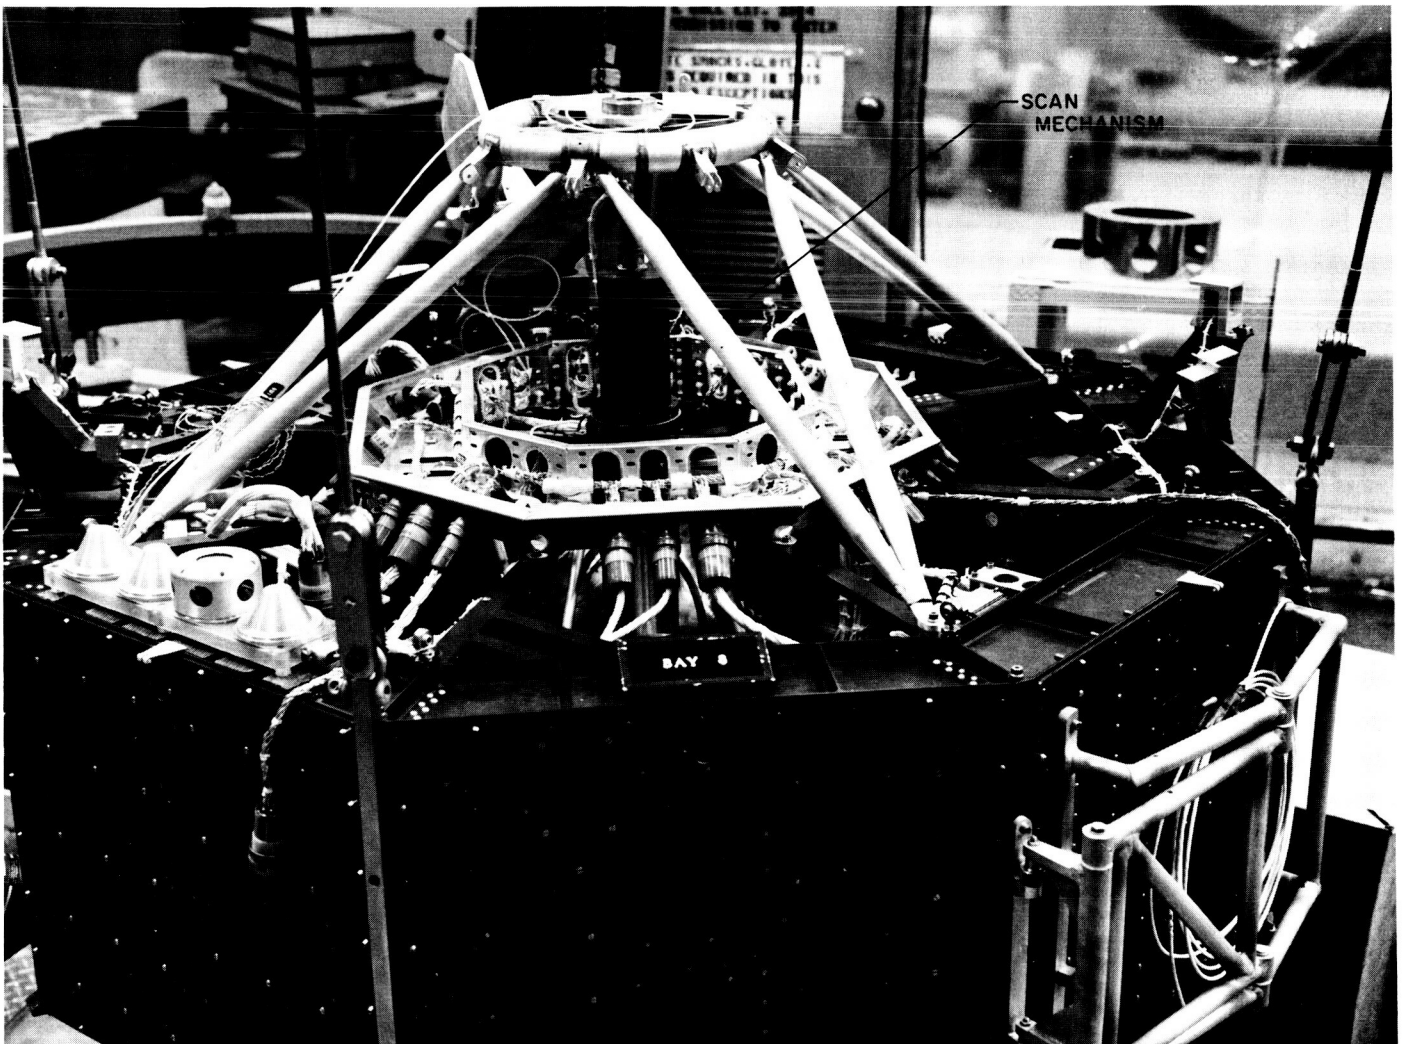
Scan mechanism mounted on partially assembled *Mariner IV* spacecraft
